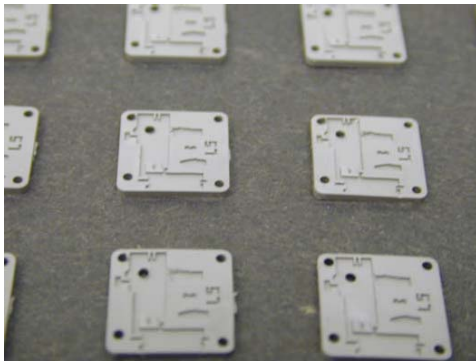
Powder metal injection molding of frames, Pennsylvania State University.
